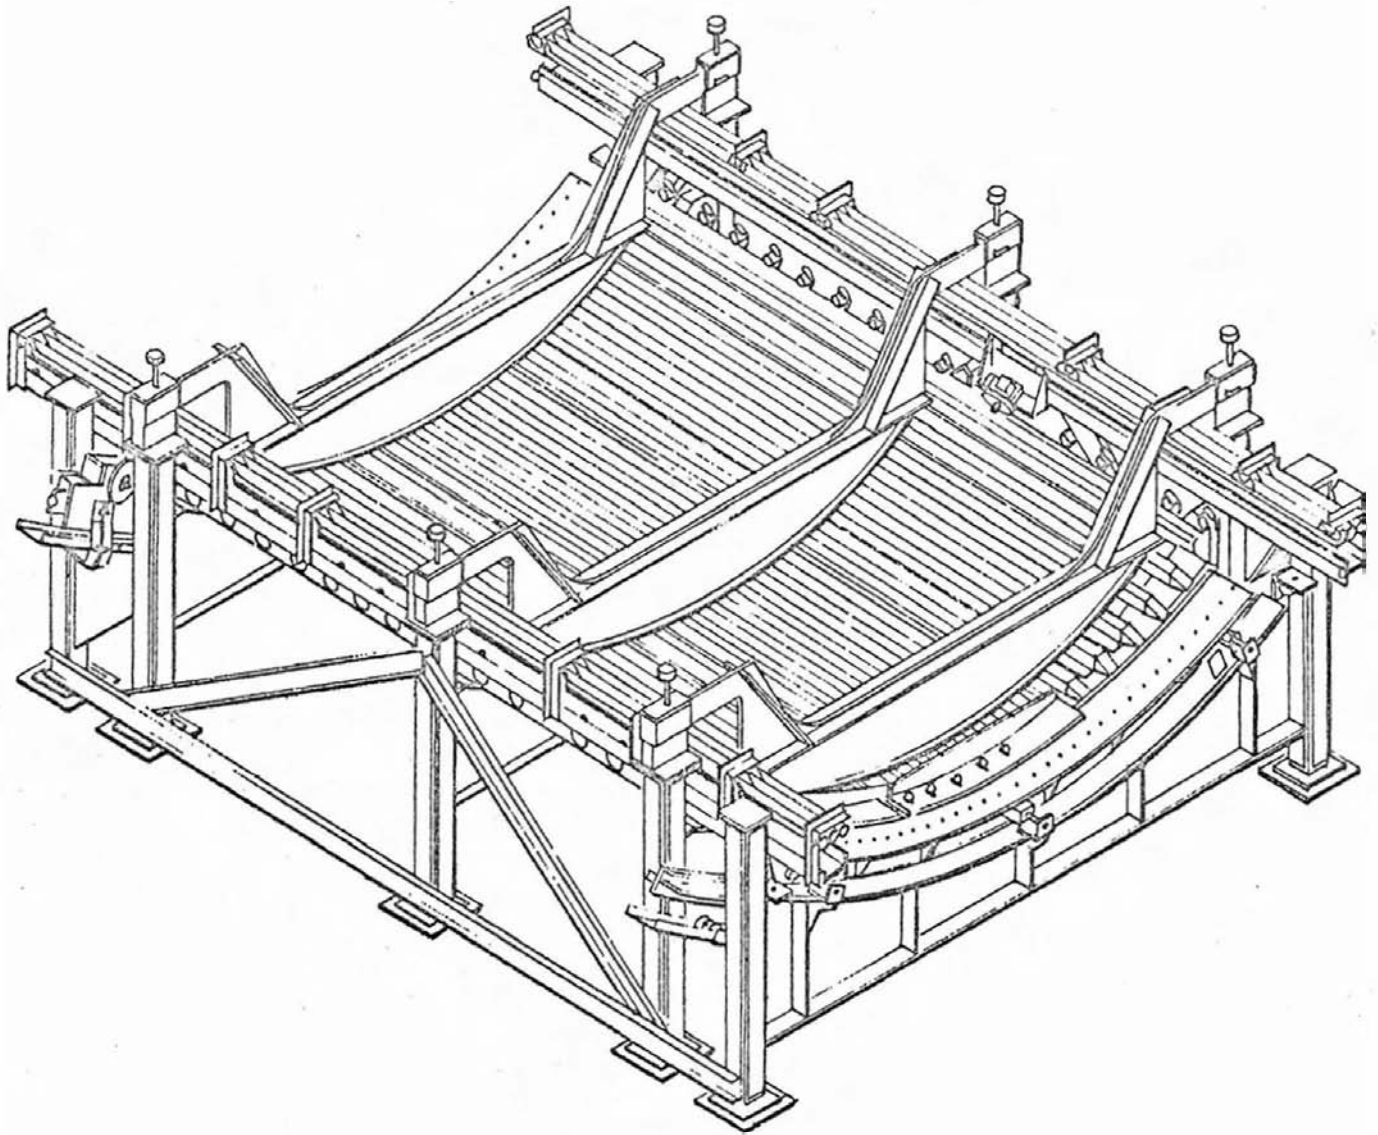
Skin Panel Subassembly Assembly Fixture AF-320-28050
